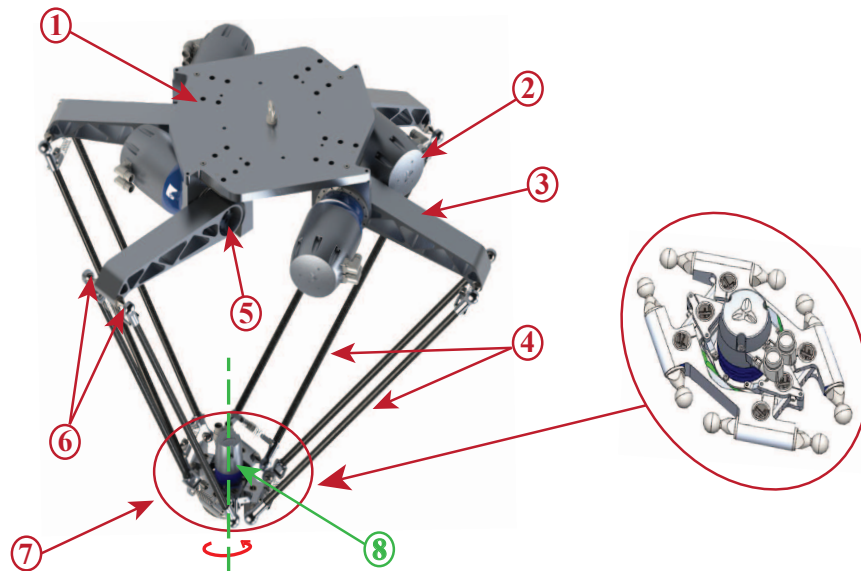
A schematic view of T3KR parallel robot including ① : Fixed base, ②: Main actuator, ③ : Rear-arm, ④: Forearms, ⑤ : Revolute active joint, ⑥ : Passive spherical joints, ⑦ : Mobile platform, ⑧ : Integrated actuator on the platform
